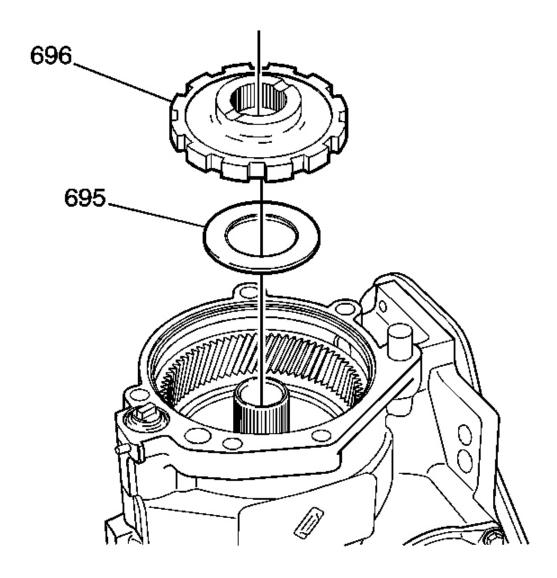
View Of Park Gear Thrust Bearing & Park Gear Courtesy of GENERAL MOTORS CORP.
